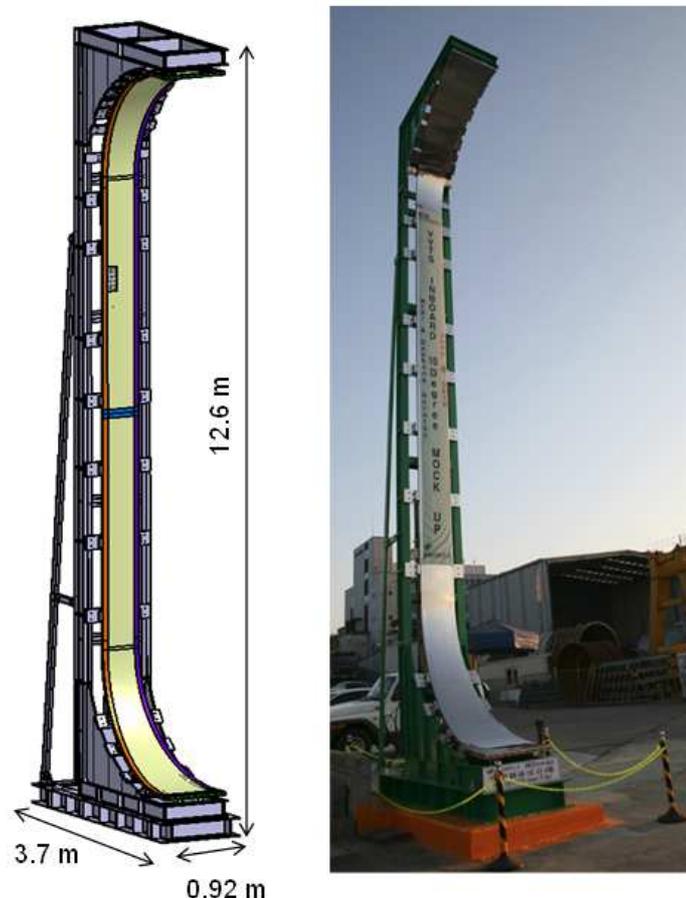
Assembly of Full-scale mock-up of Inboard 10 degree section of VVTS.
